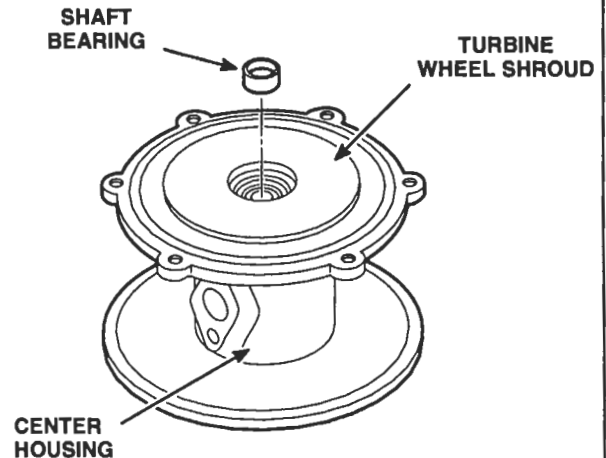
Center Housing Shaft Bearing Installation (Turbine End)
